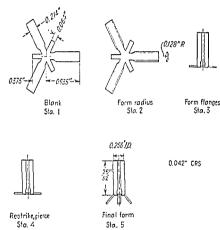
Development of a guide made from 0.042-in, cold-rolled steel on an cyclet machine. (Brighton Division, Advance Stamping Co.)
